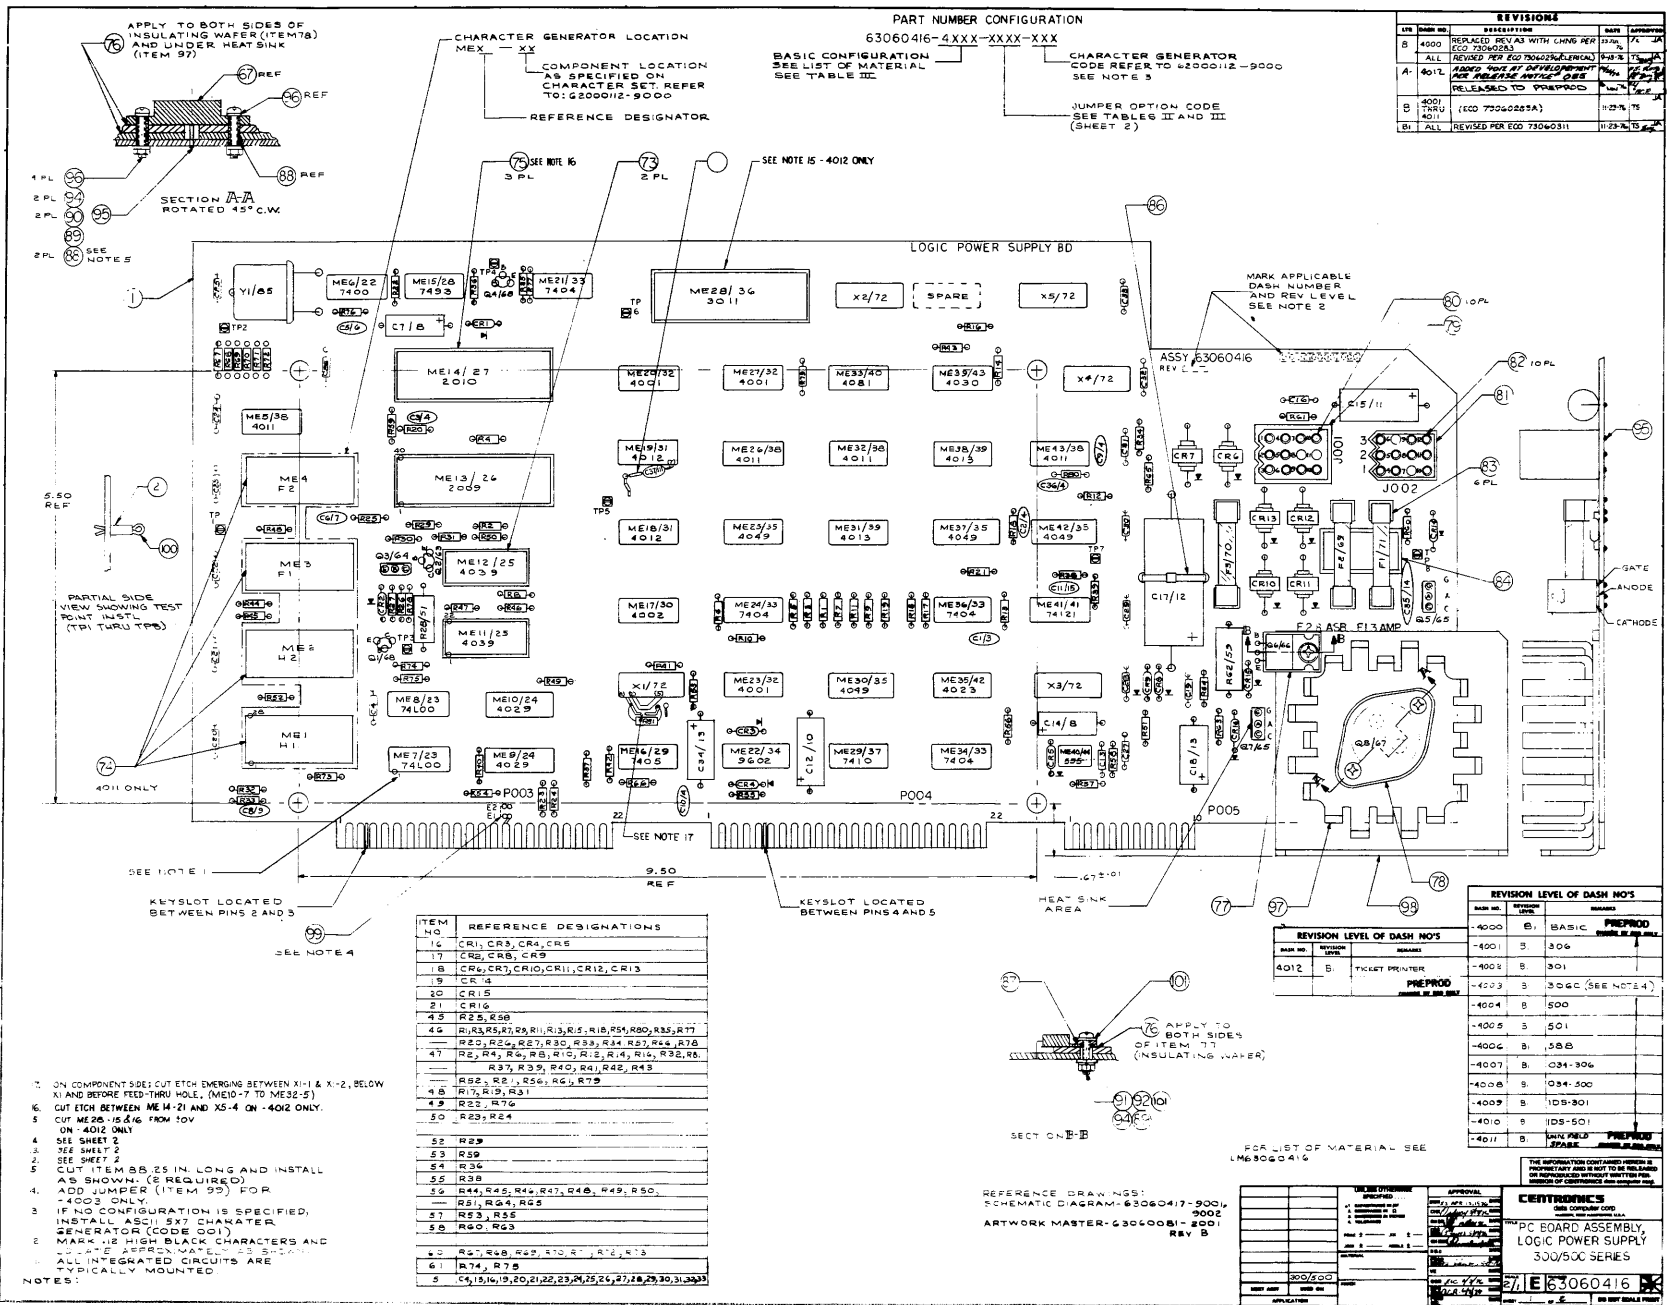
PC BOARD ASSEMBLY, LOGIC/POWER SUPPLY BOARD, 300/500 SERIES (SHEET 1 OF 2)
